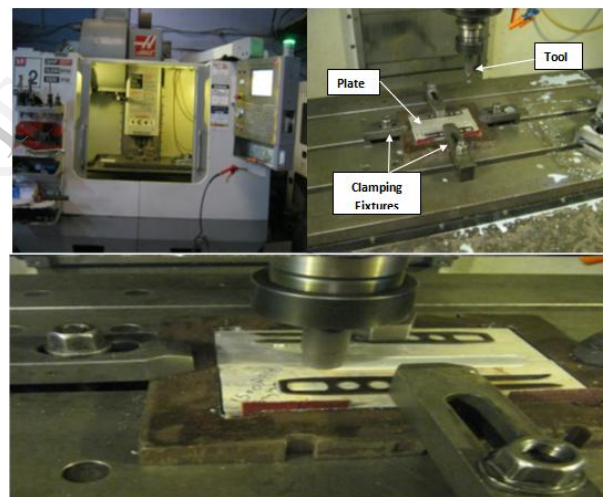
Experimental Setup Describing Clamping and Welding of FSW Plates
